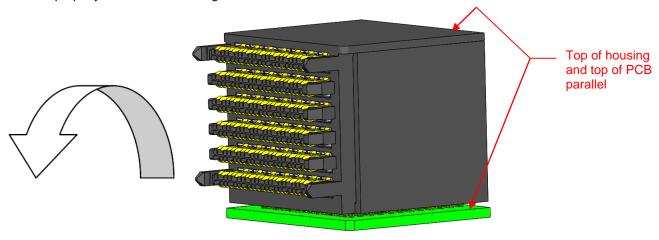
Connector Rotated Parallel to the Top of PCB and EONs Aligned
